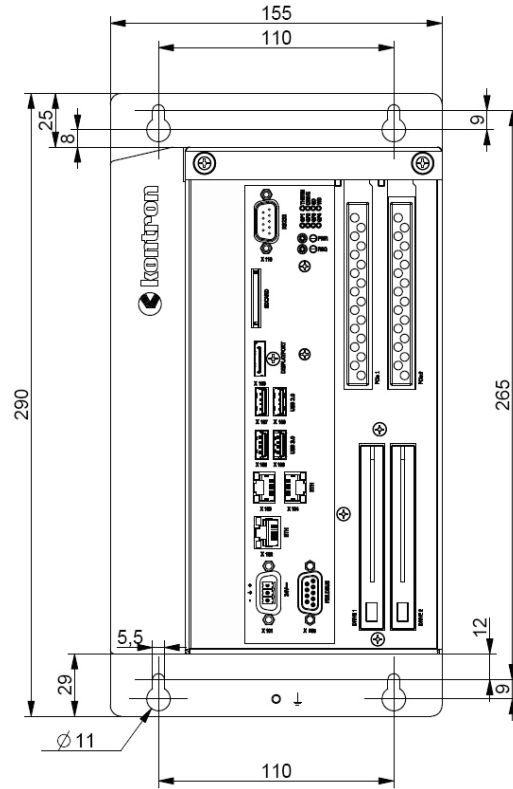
Dimensions: detail key hole (KBox C-102-2)
